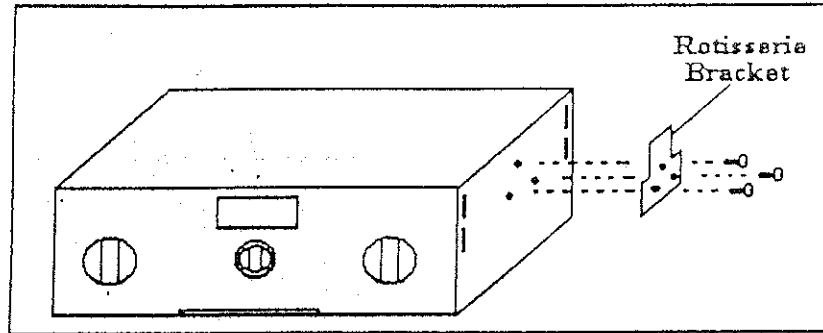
Attach the rotisserie bracket to the side of the grill using the screws provided.
